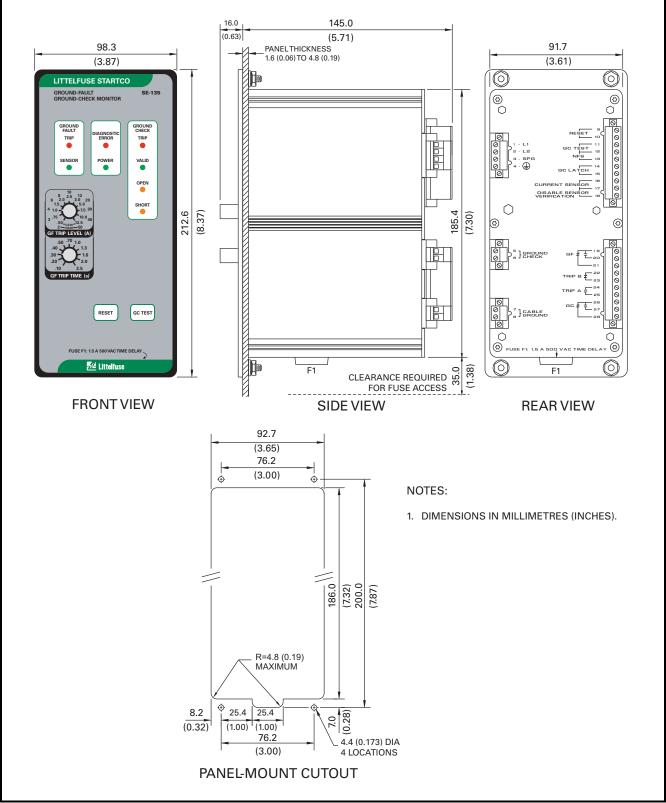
SE-135 Outline and Panel-Mounting Details.
